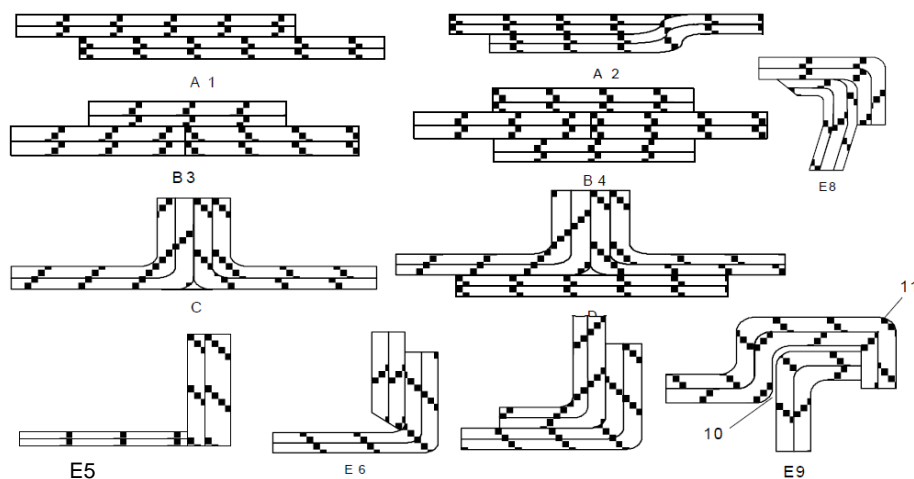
Soldered joints: A1, A2 - simple overlapping and bending;
